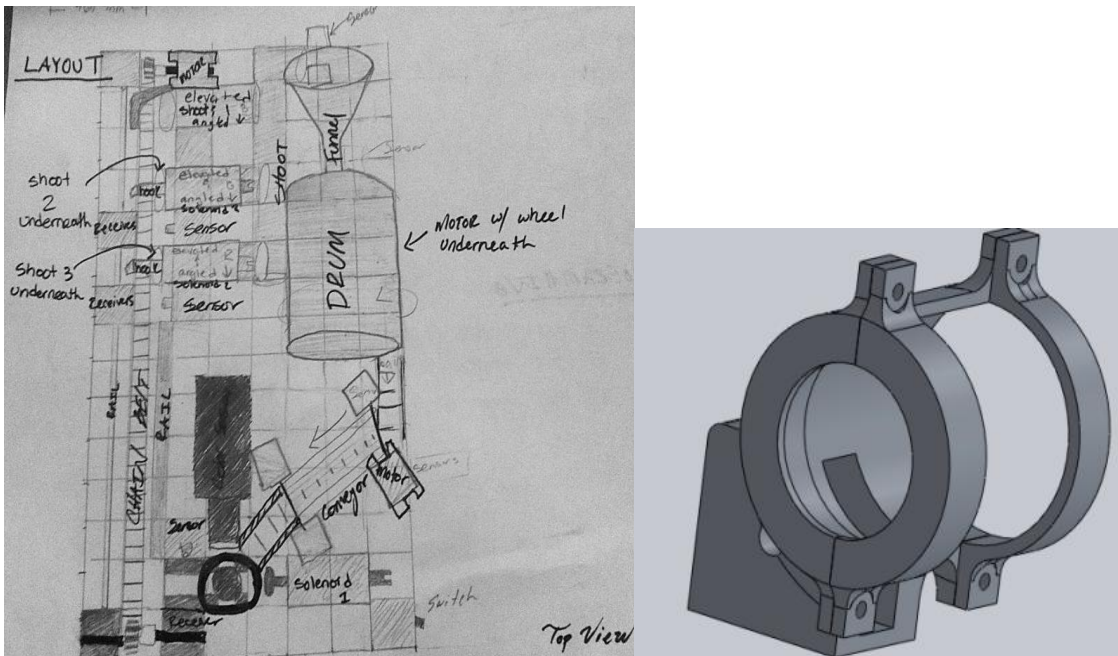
Sketch of Overall Marble Sorting System Design and CAD Drawing of Mixing Mechanism Design
